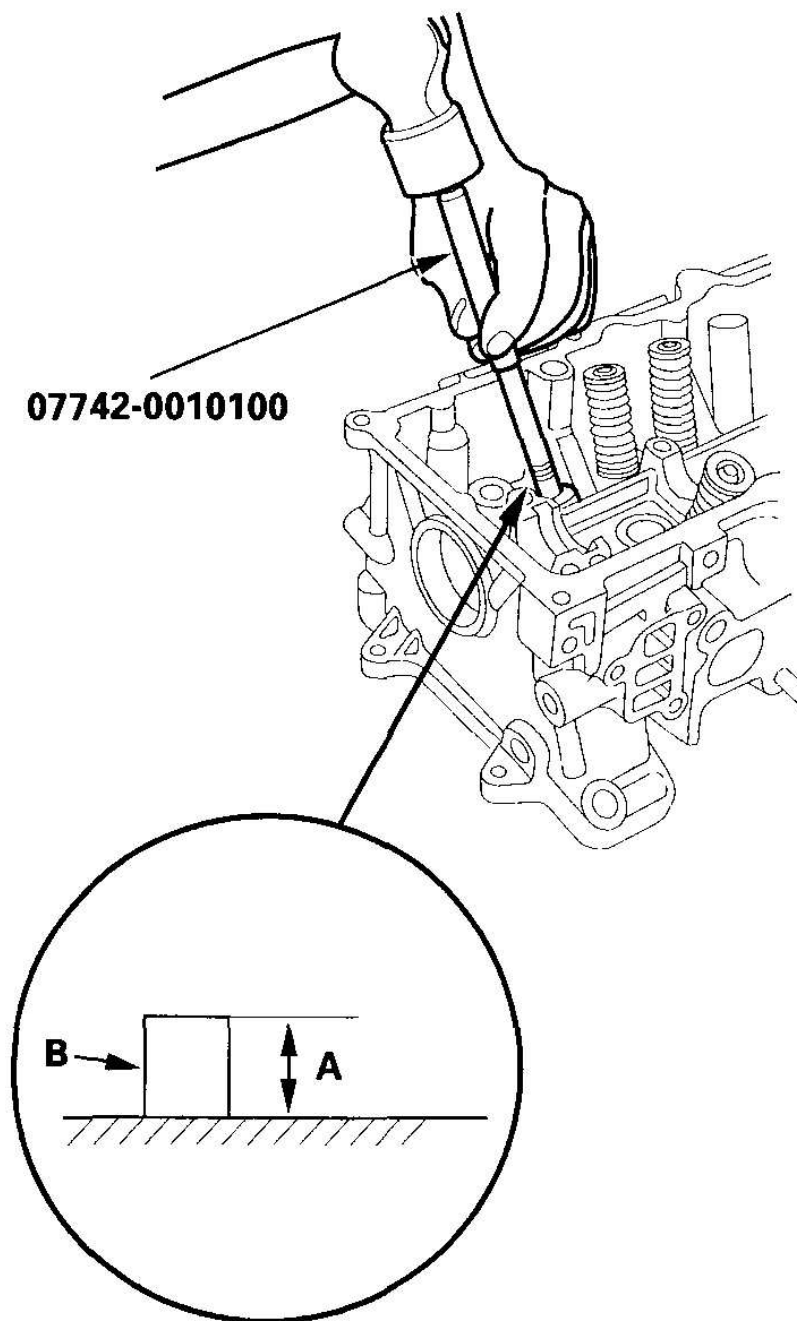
Guiding Out Toward Camshaft Side Of Head
